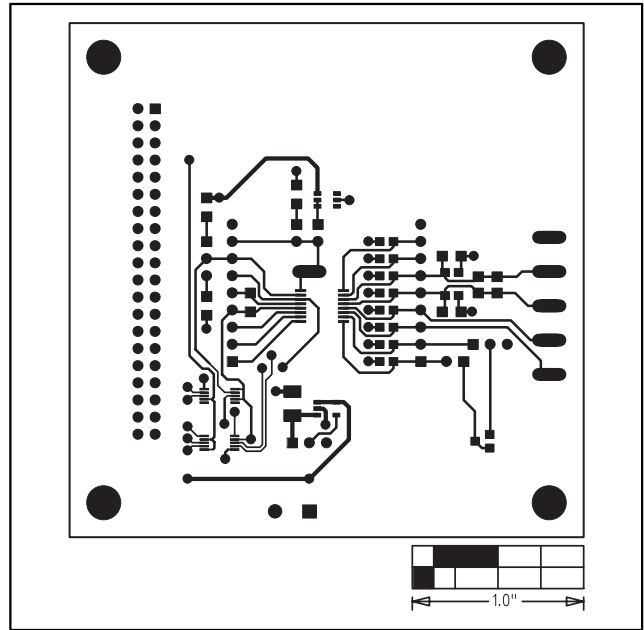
MAX1254 EV Kit PC Board Layout—Component Side
